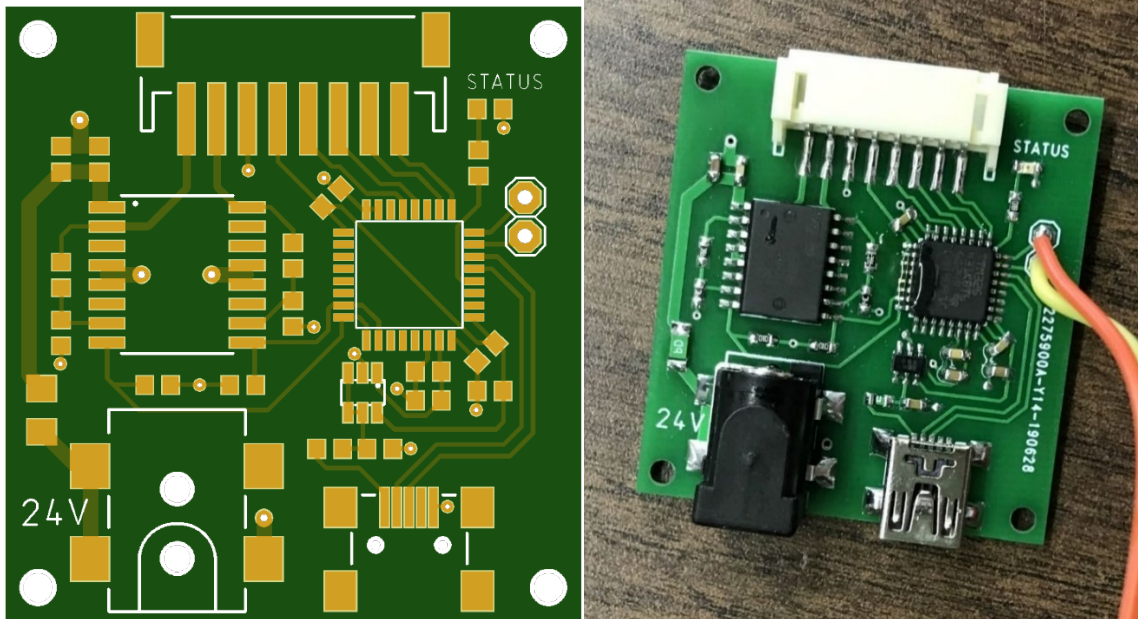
Motion controller PCB design (left). Hand-soldered motion controller PCB (right).
